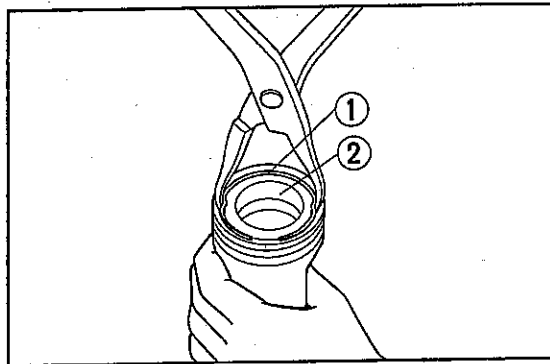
① Oil seal stop ring ② Oil seal
